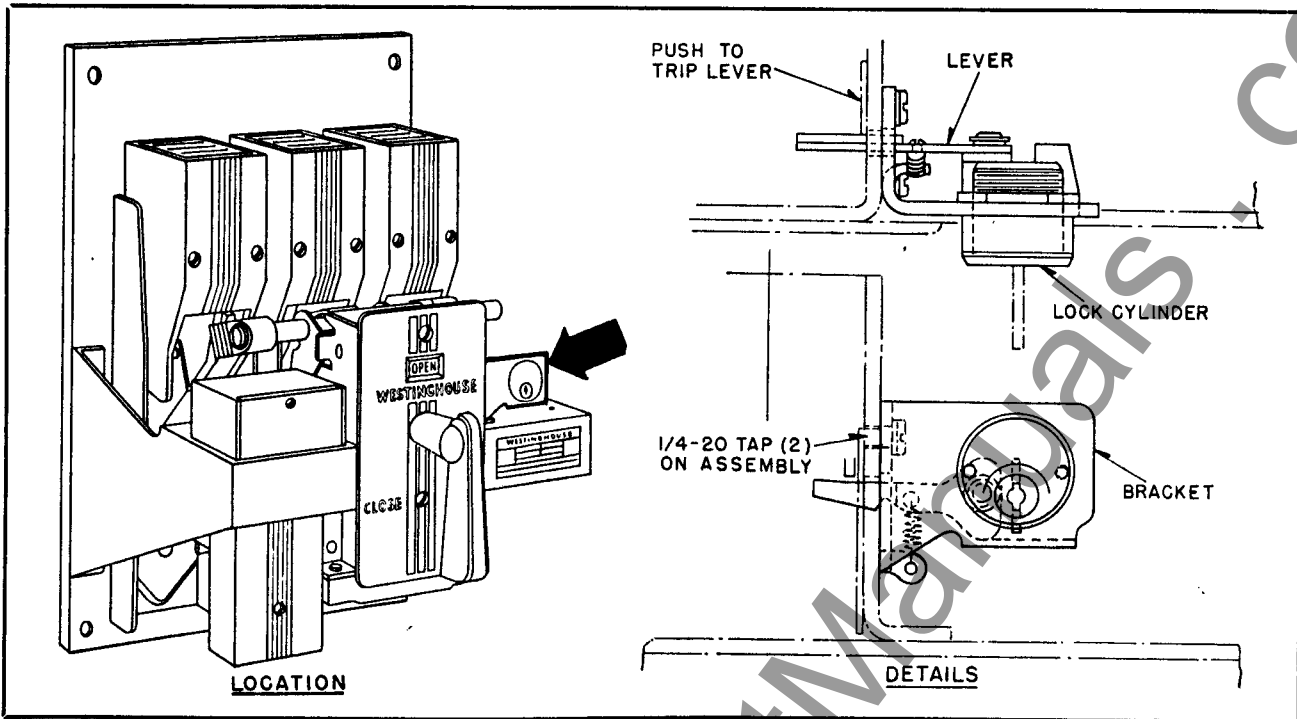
Key Interlock Attachment For Fixed Breaker—Location and Construction Details
